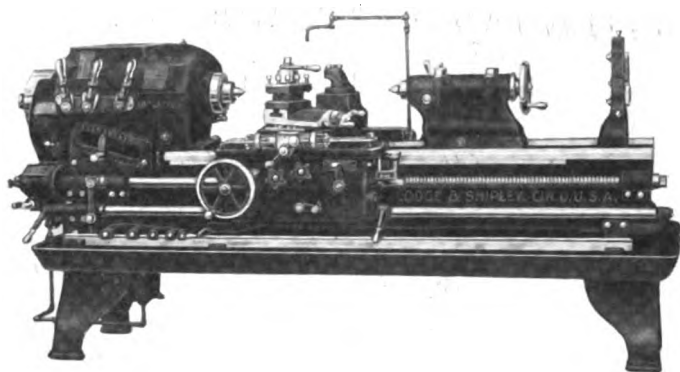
18" Selective Head Manufacturing Lathe, Made in Sizes 14" to 30" with Either Selective or 3-Step D.B.G. Headstocks
